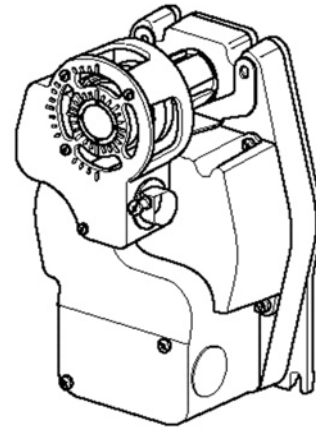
Honeywell ML4X02/8X02, ML4115/8115 or MS4X09/8X09 electric actuators with MLS-300 (Honeywell) position indicator package.
